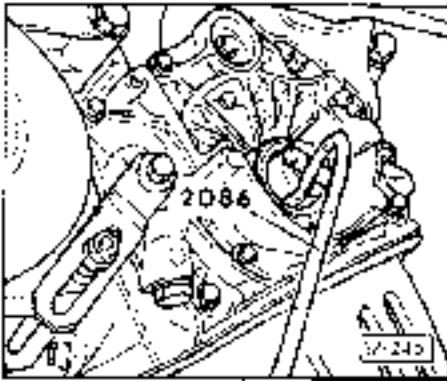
Reinstalling crankshaft (1) seal, pulley and
